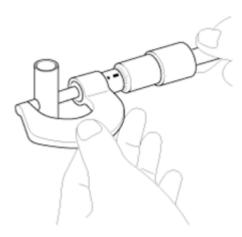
Measuring Diameter Of Piston Pin Courtesy of KIA MOTORS AMERICA, INC.
